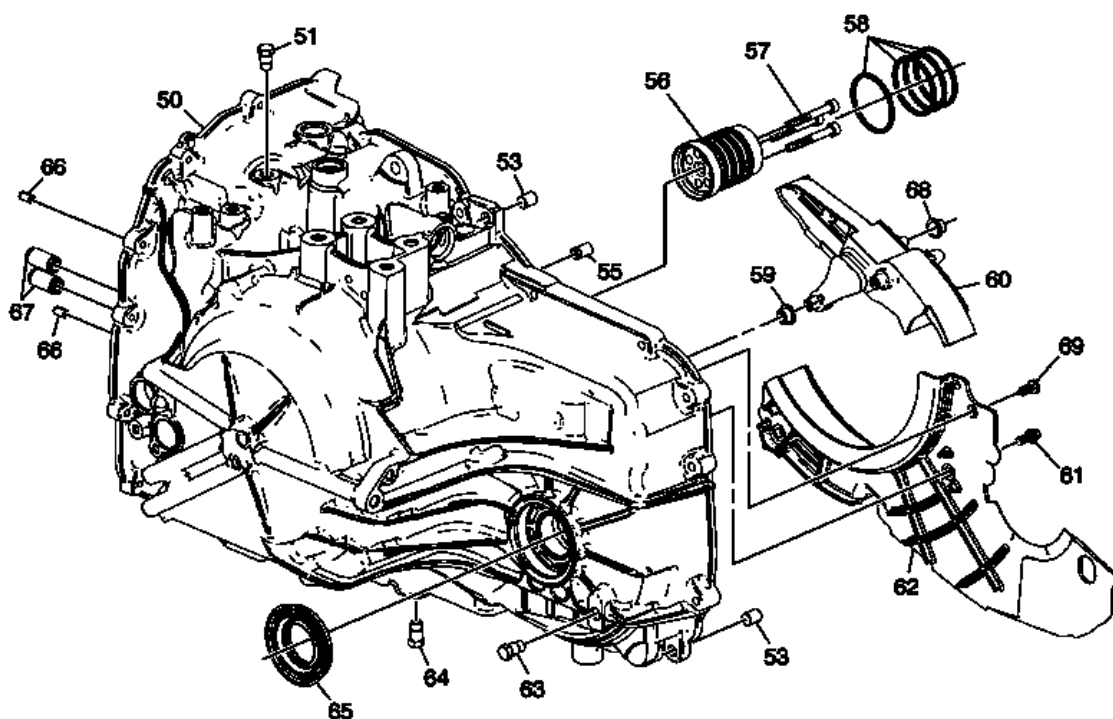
Transmission Case Assembly -- 6T30 -- Gen 1
